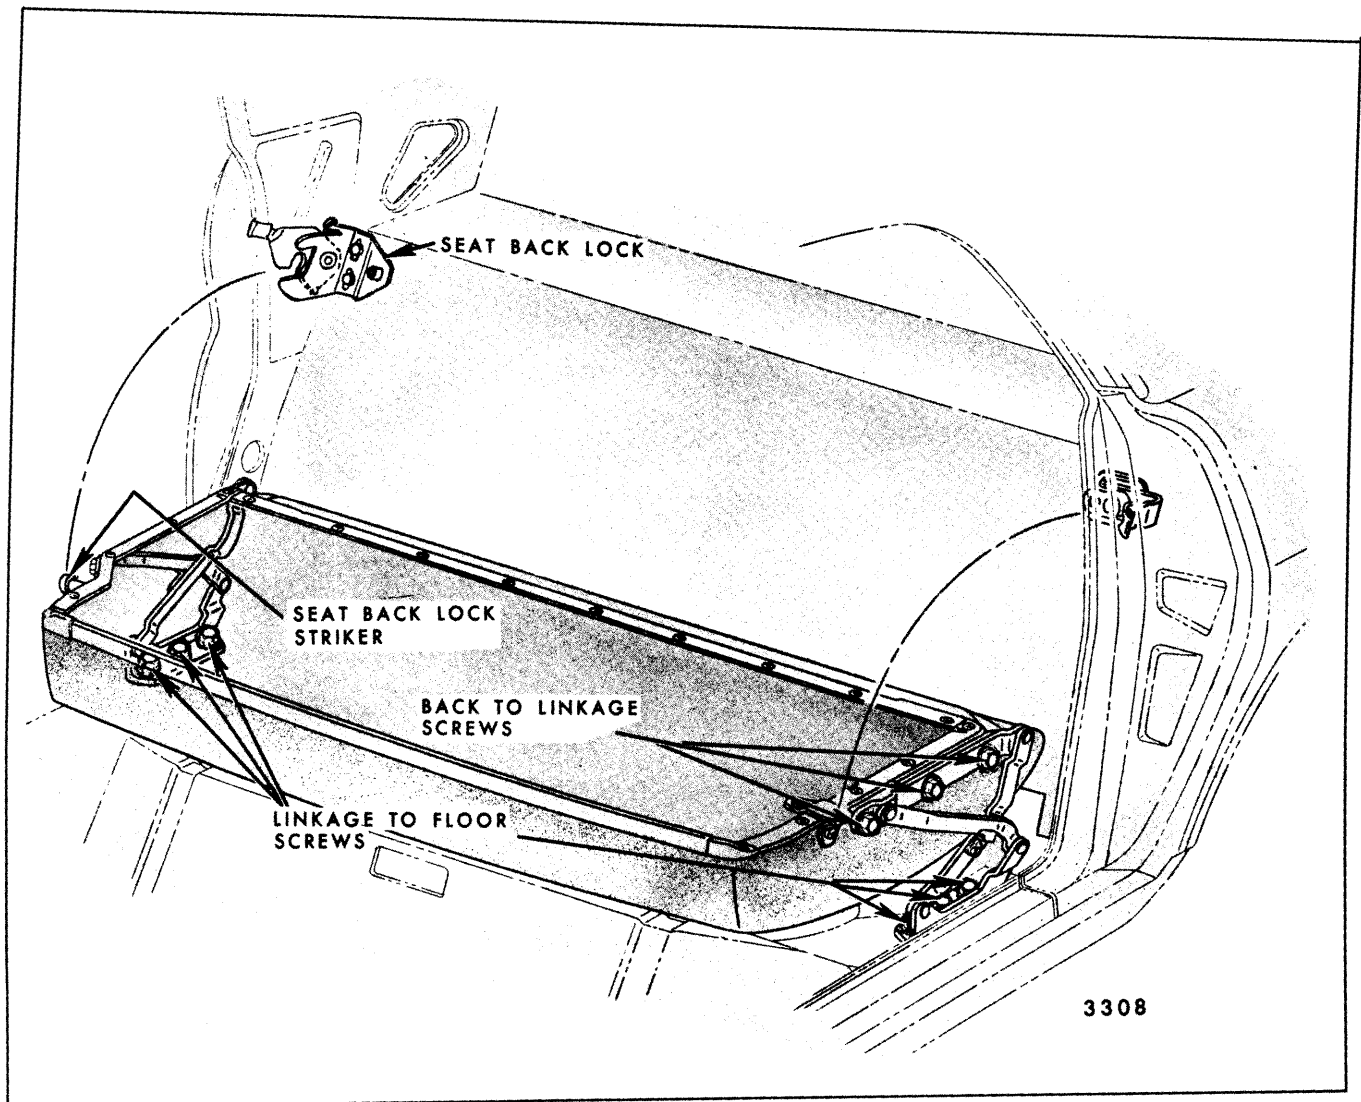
Folding Rear Seat Back and Lock - Corvair
